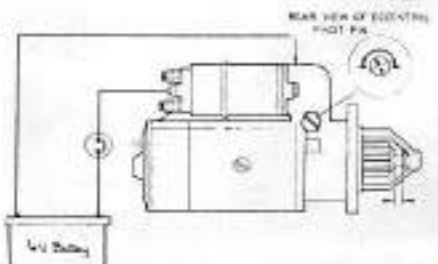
Use a 6-volt battery when checking pinion setting. Refer to text.
